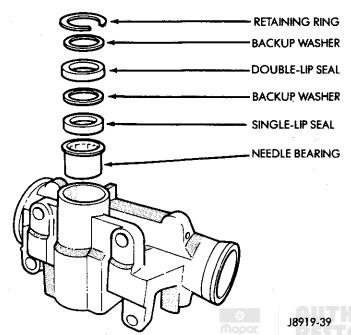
Pitman Shaft Bearing, Seals & Washers
